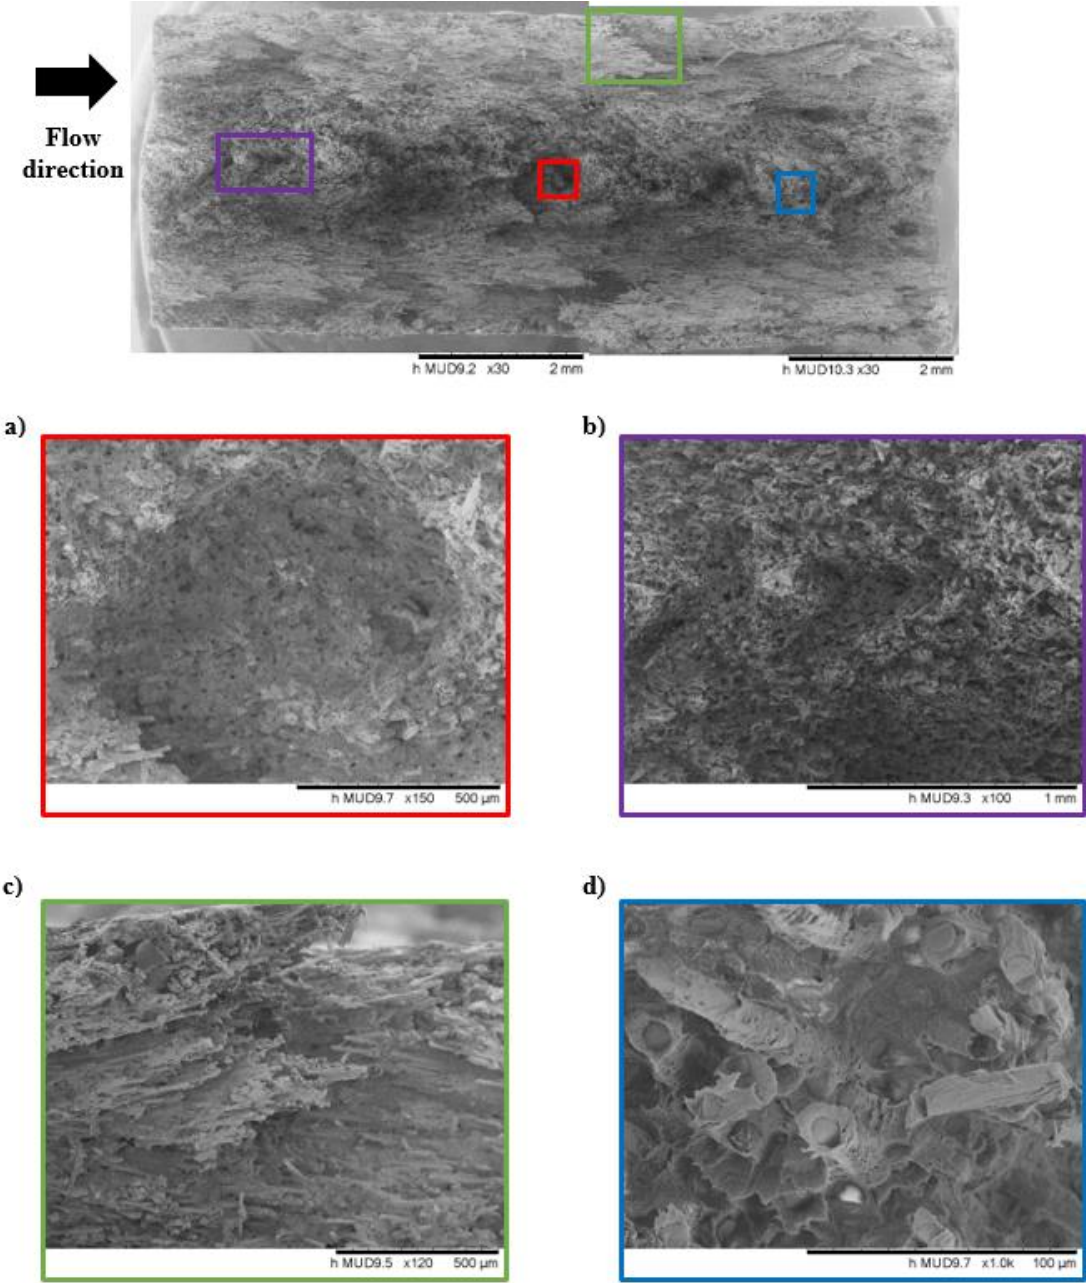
Fracture surface of a tensile 90° specimen at 100° C
